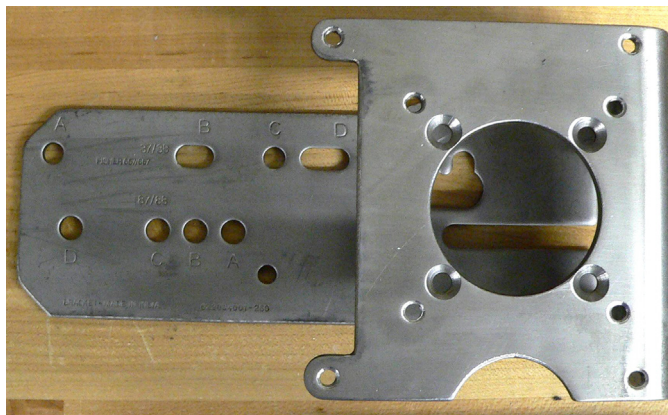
Reciprocating Valve Mounting Bracket for Standard Lever
